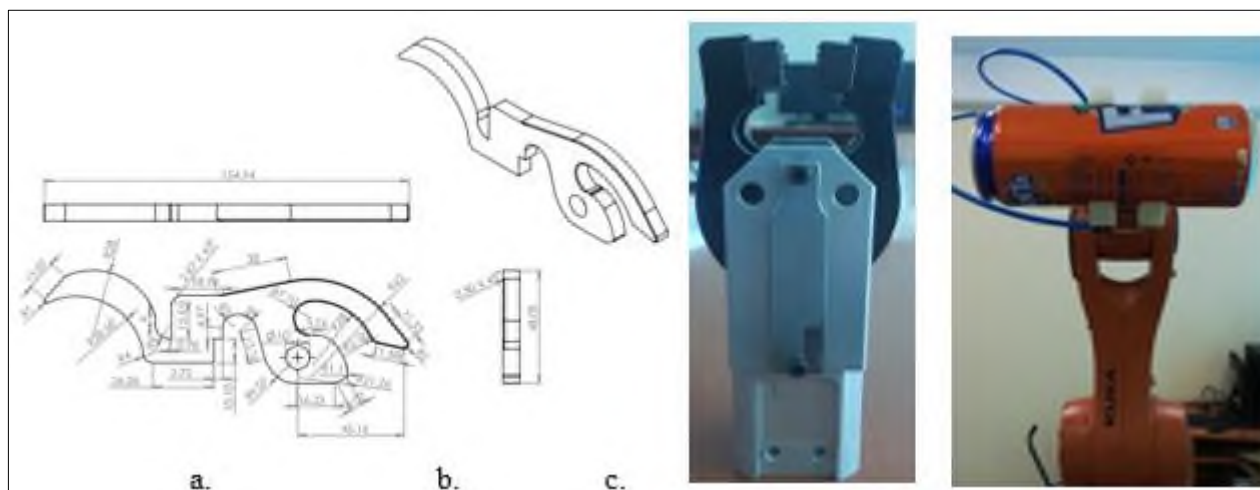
a. View of the 3D printed gripper jaw, b. De-sta-co gripper, c. view of the clamped soda can
